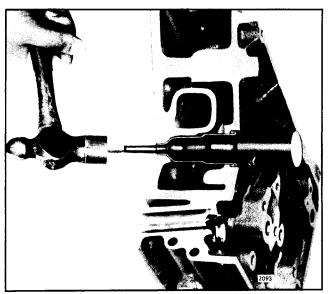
Removing Injector Tube using Tools J 5286-4A and J 5286-5
